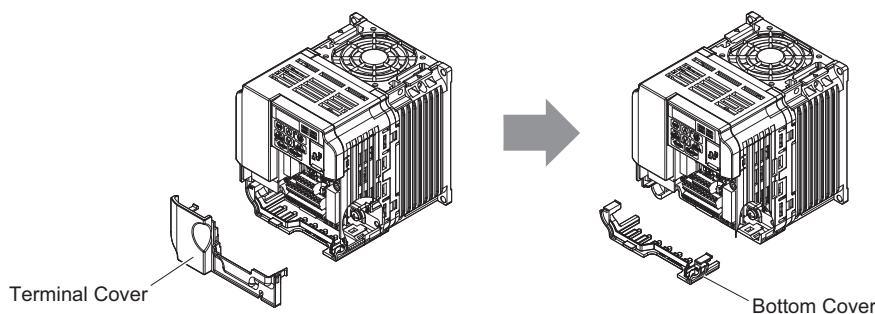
Remove the Terminal Cover and Bottom Cover on an IP20/Open-Chassis Drive (Models CIMR-V□BA0006B to BA0018B; 2A0008B to 2A0069B; 4A0001B to 4A0038B)
